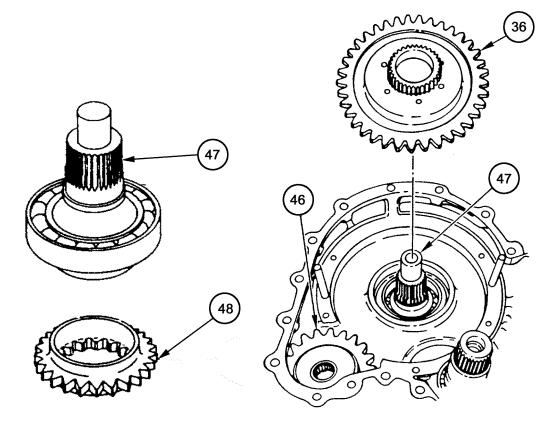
Left Steer Gear and Output Sun Gears. (Repeated)
